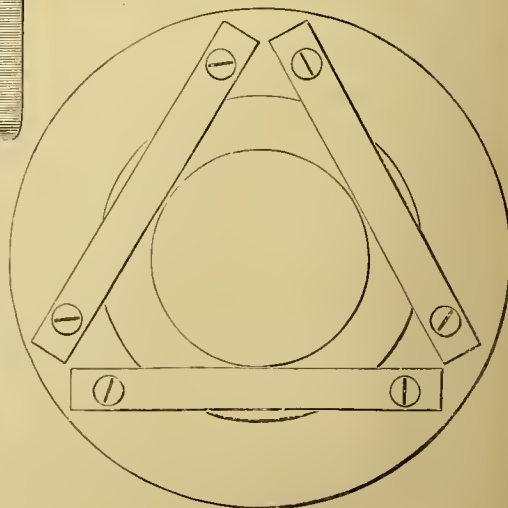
ALTERNATIVE MODE OF CHUCKING CYLINDER.
